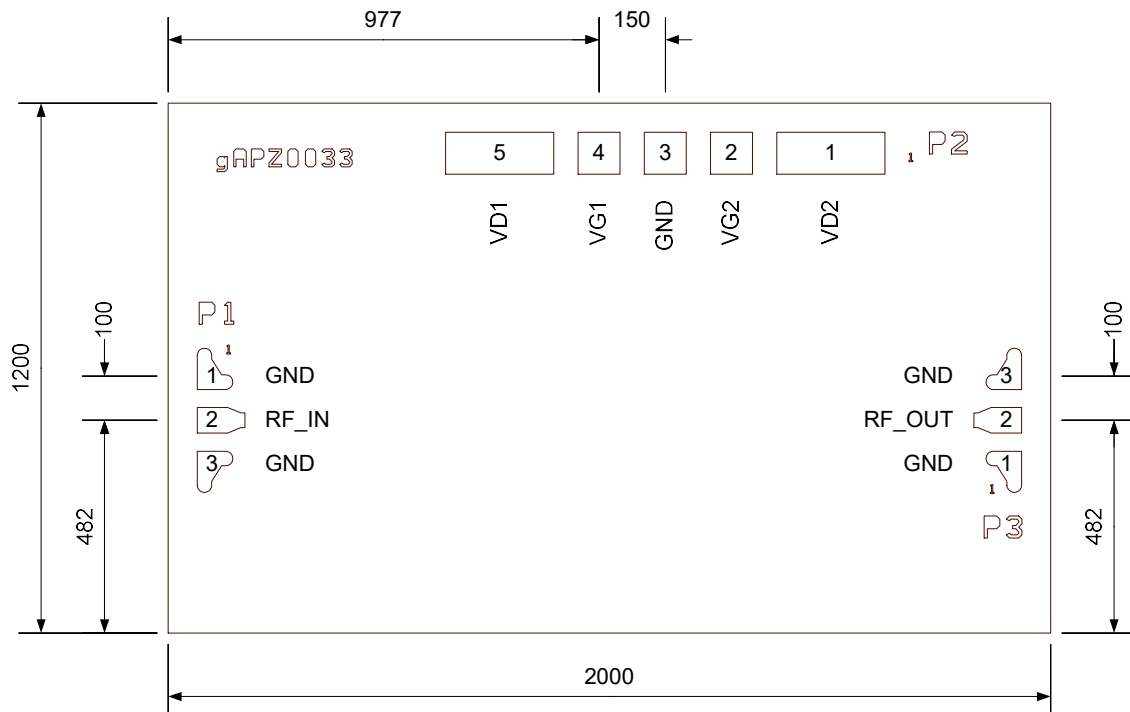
Outline drawing of the MMIC. Dimensions are in µm.
